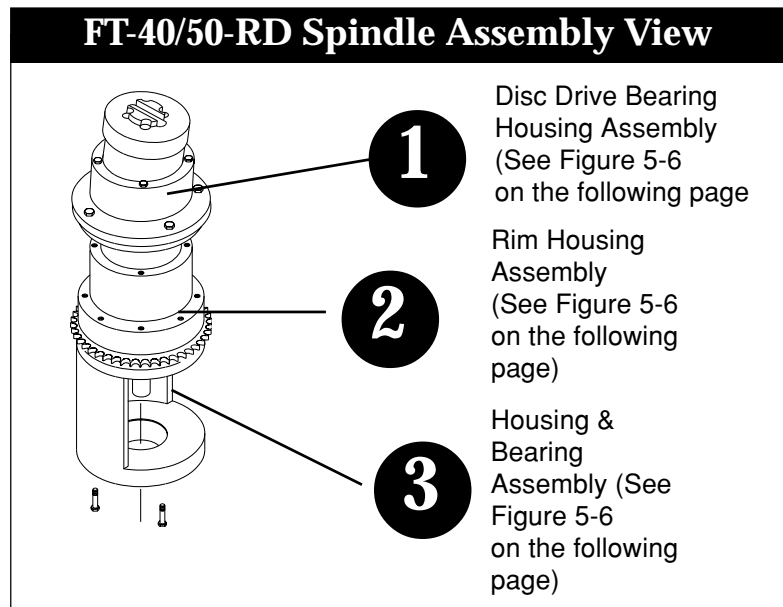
FT-40/50-RD Feeder Spindle Assembly
